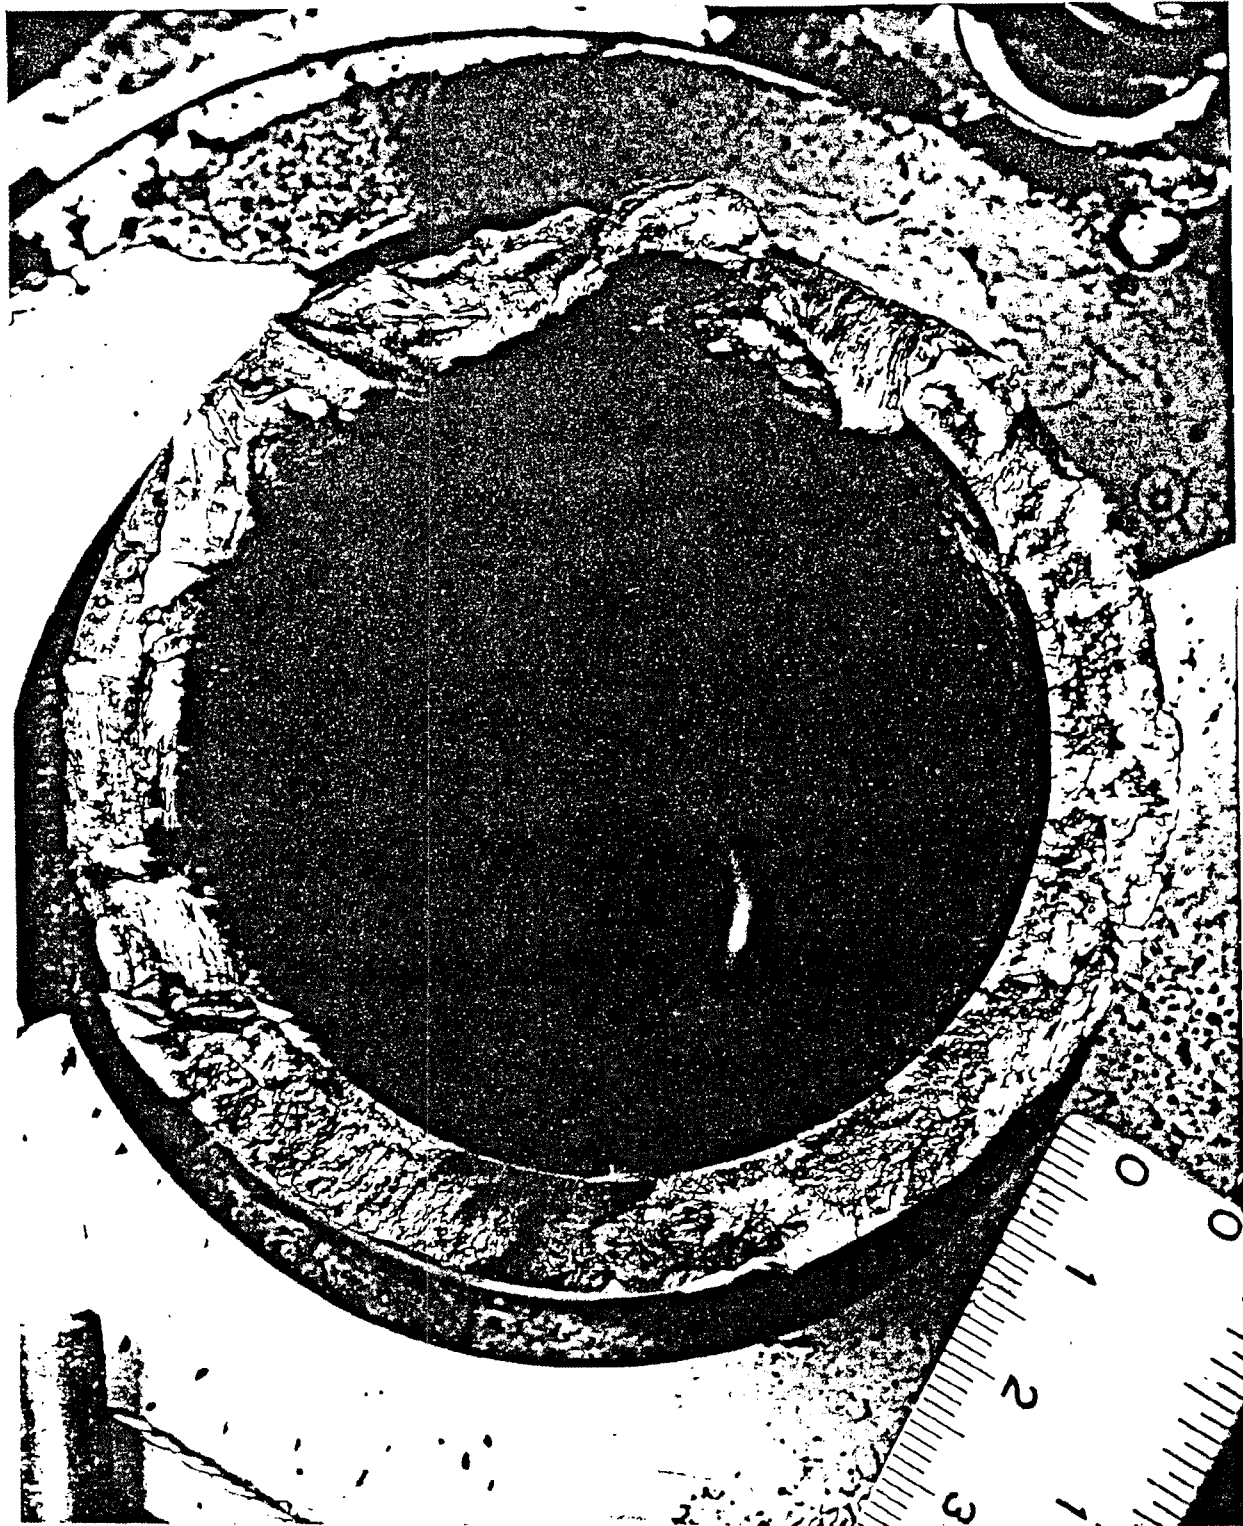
Fracture surface of the LH-engine propeller shaft.
